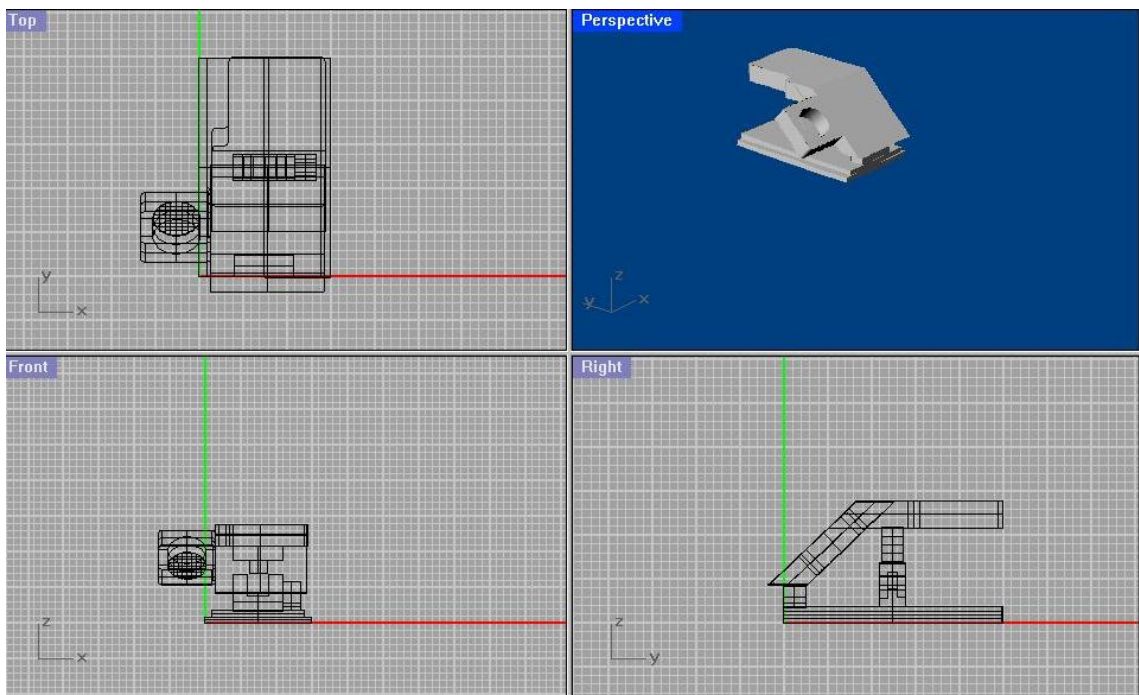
Technical view of apparatus of redesigned air condition control panel
